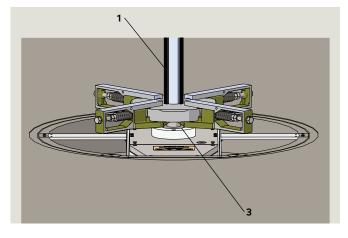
Center shaft bottom plug installed in speed control drive shaft
